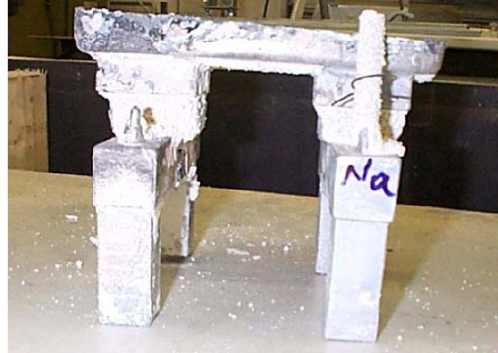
Employment of NaBF_4 leads to well-protected surfaces (right-hand-side marked Na). Left-hand-side pieces show ceramic material stuck on the surface due to mould-metal reactions [Cin06]
